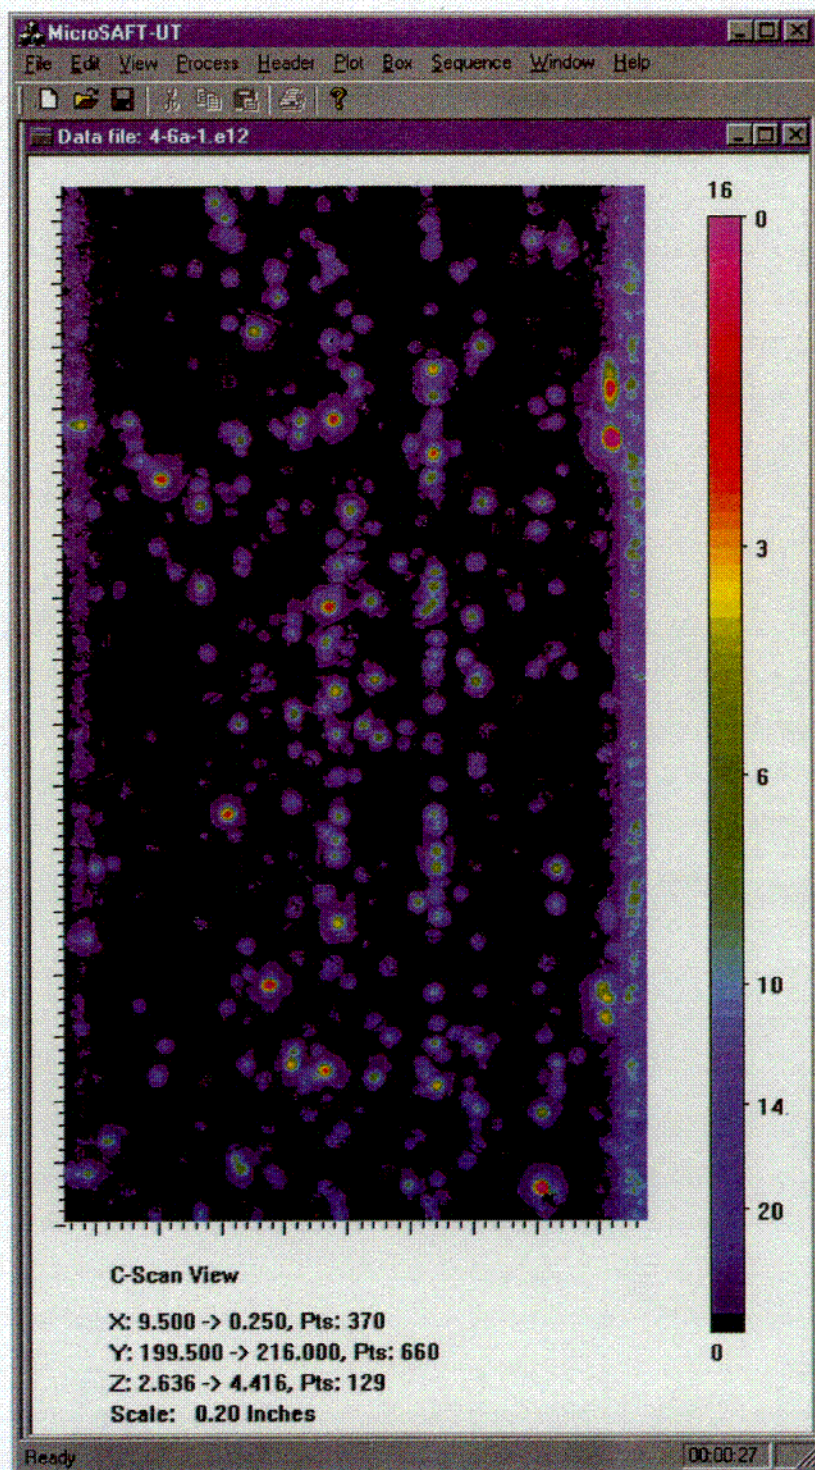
C-scan (top view) Image of Small Flaw Indications on the Weld Fusion Surface, from Weld-Normal UT Inspection
